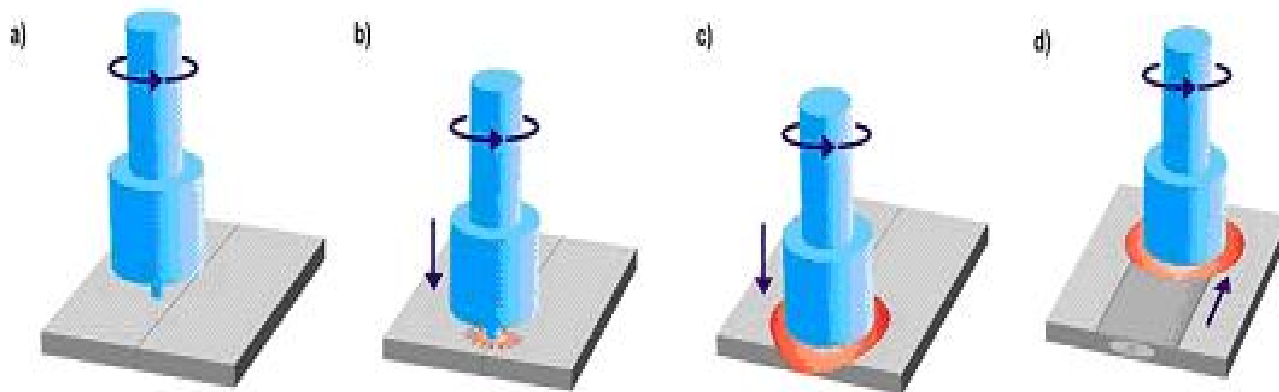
friction stir welding process: (a) rotating tool prior to contact with the plate; (b) tool pin contacts plate creating heat; (c) Shoulder of tool contacts plate restricting further penetration while expanding the hot zone; (d) plate moves relative to rotating tool creating a fully re-crystallized, fine grain microstructure.
